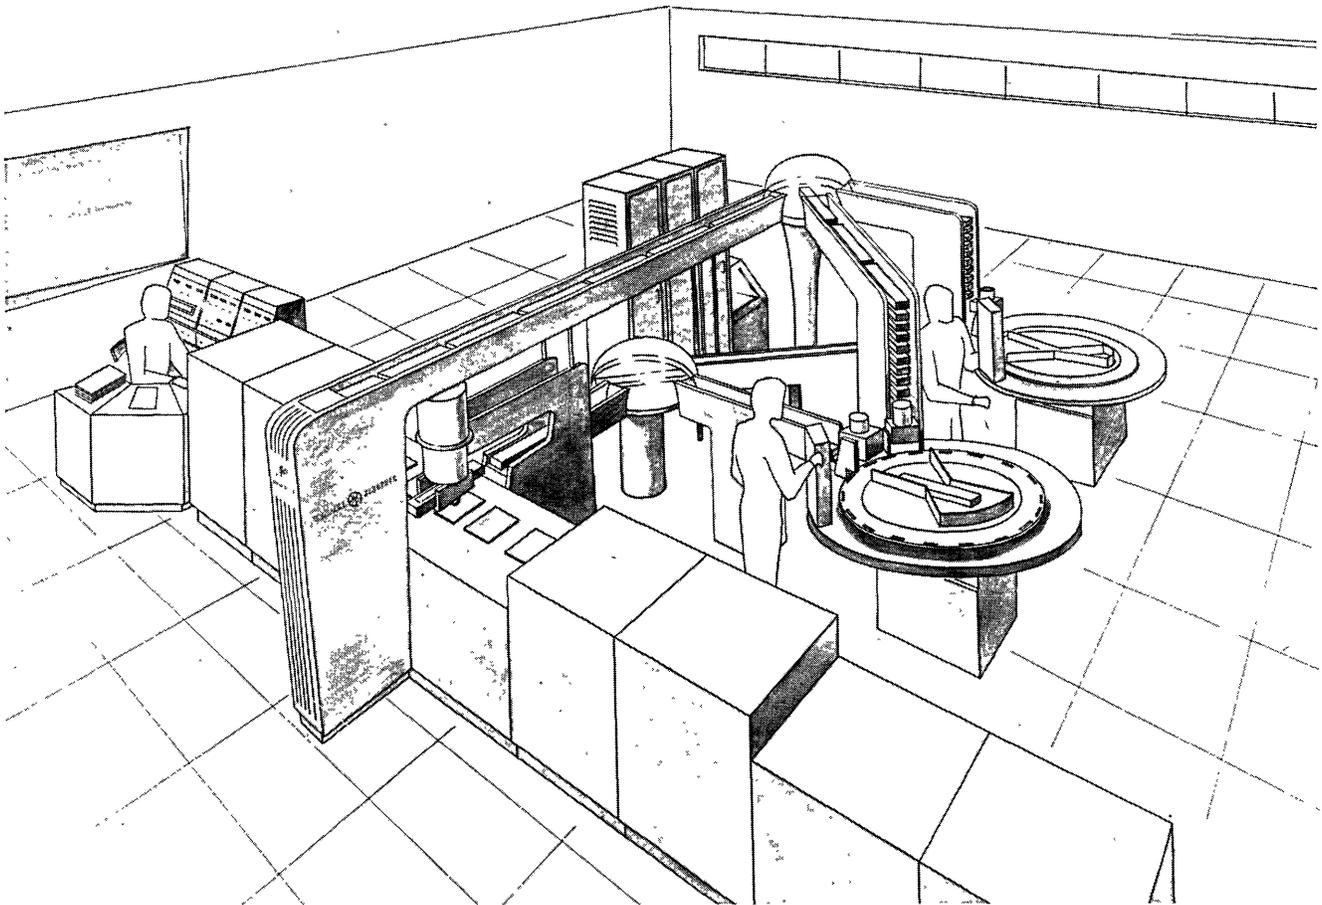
General Electric's Automatic Component Assembly System -- The placement head unit is at the left. Pallets bearing circuit boards pass beneath. The operator at the far left operates the central control desk, and feeds circuit boards into the ACAS. Two operators at the right feed components. The electronic information reader and the distribution instructions are in three vertical enclosures at the top center. The circuit boards, after being assembled, are soldered and tested in the four enclosures at the bottom, right. The ACAS can be changed immediately to place new and different components on new and different types of printed-wiring circuit boards. It is scheduled for completion in the middle of 1955.
